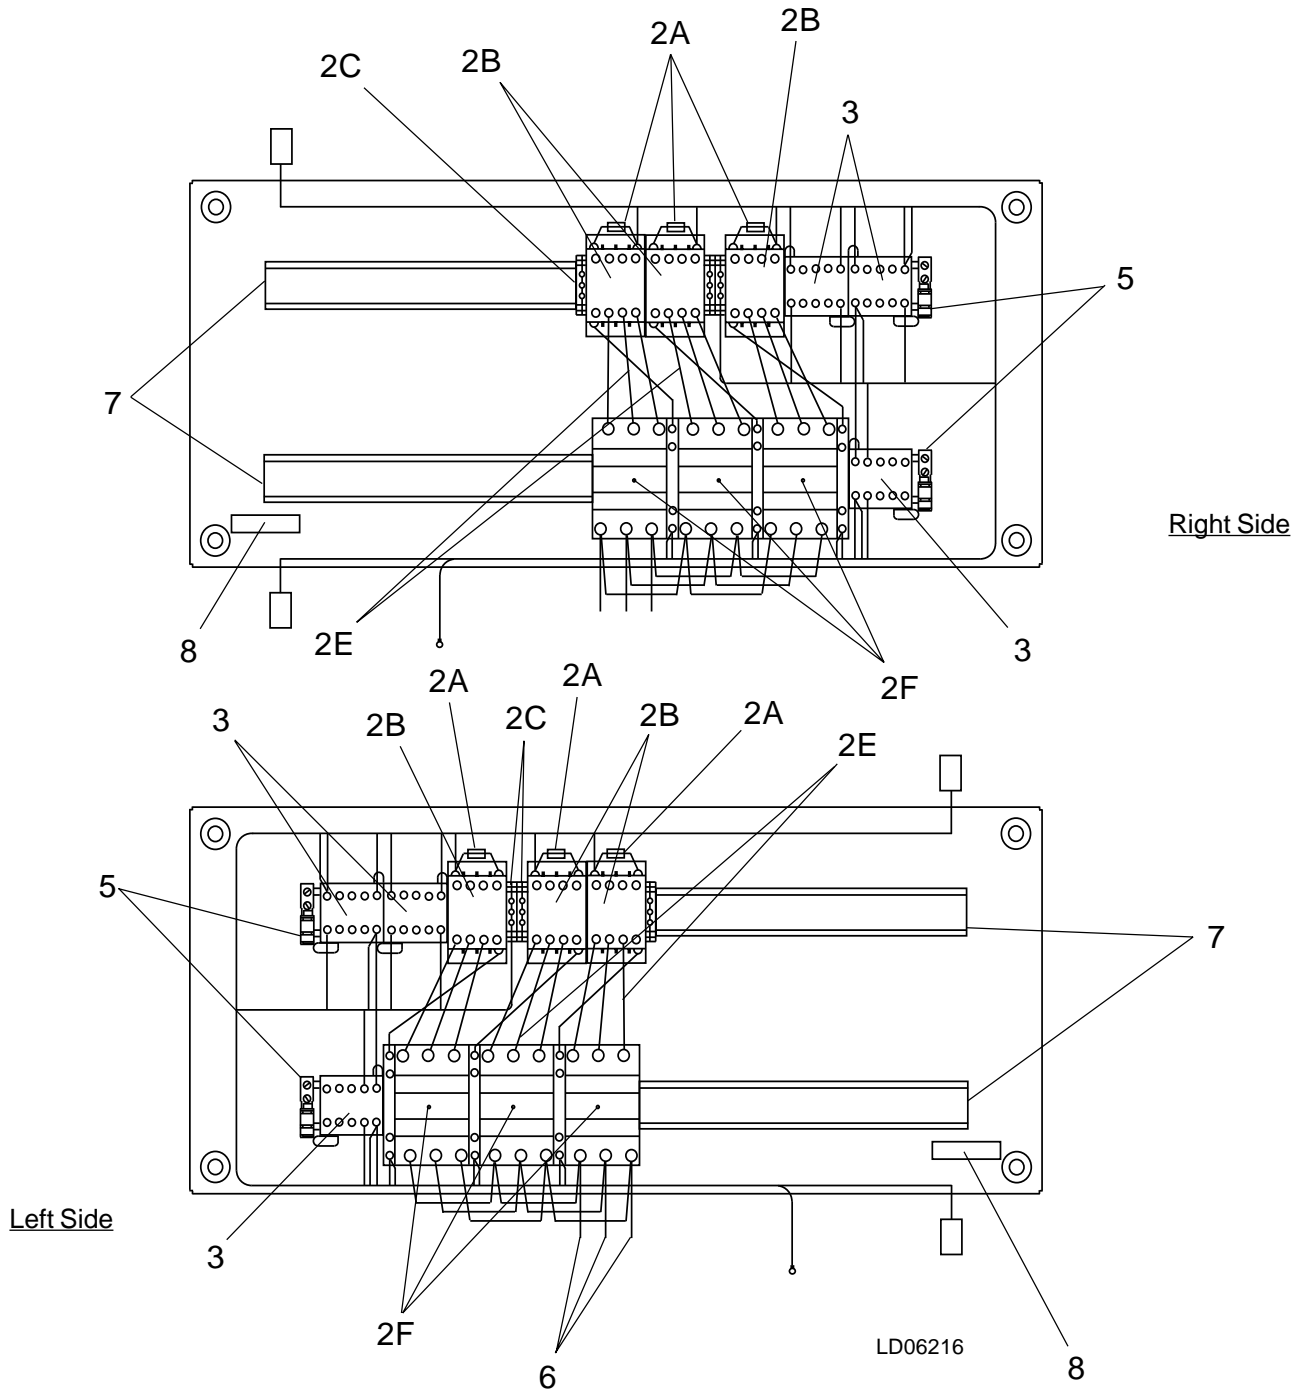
3 FAN CONTACTOR PANEL COMPONENTS– YCAS F (REF. TABLE 23, PAGE 48)
